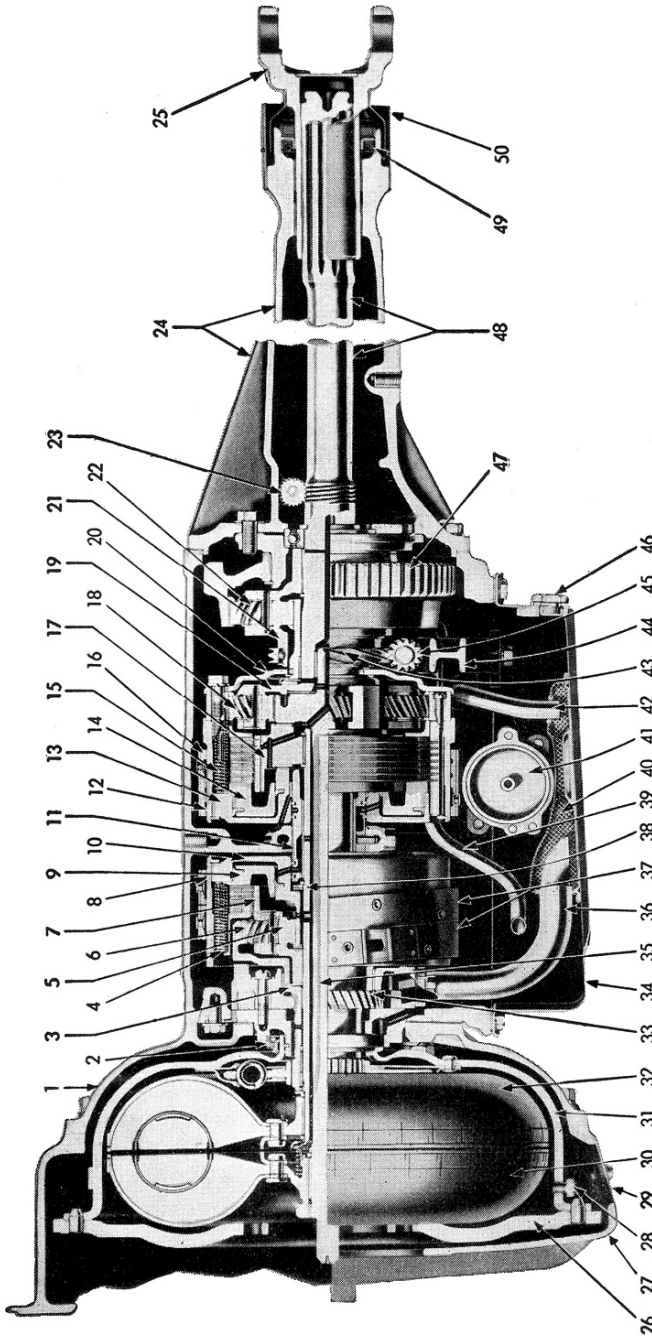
The first automatic automobile gearbox, produced since 1939, is the Hydramatic by GM. We can see, starting from the left side of the engine, the hydraulic clutch, followed by three epicyclic gear trains, able to obtain three forward and a reverse speed.
